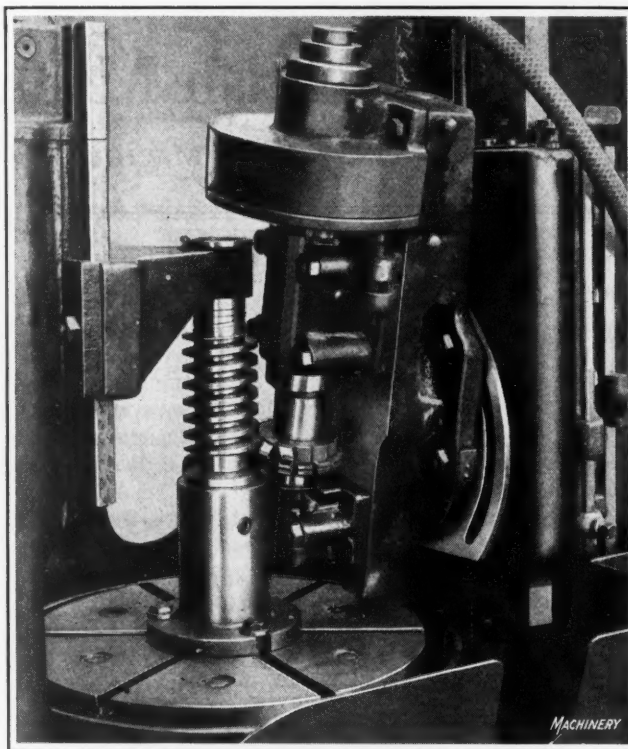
Single-threaded Worm and Set-up for hobbing the Threads
